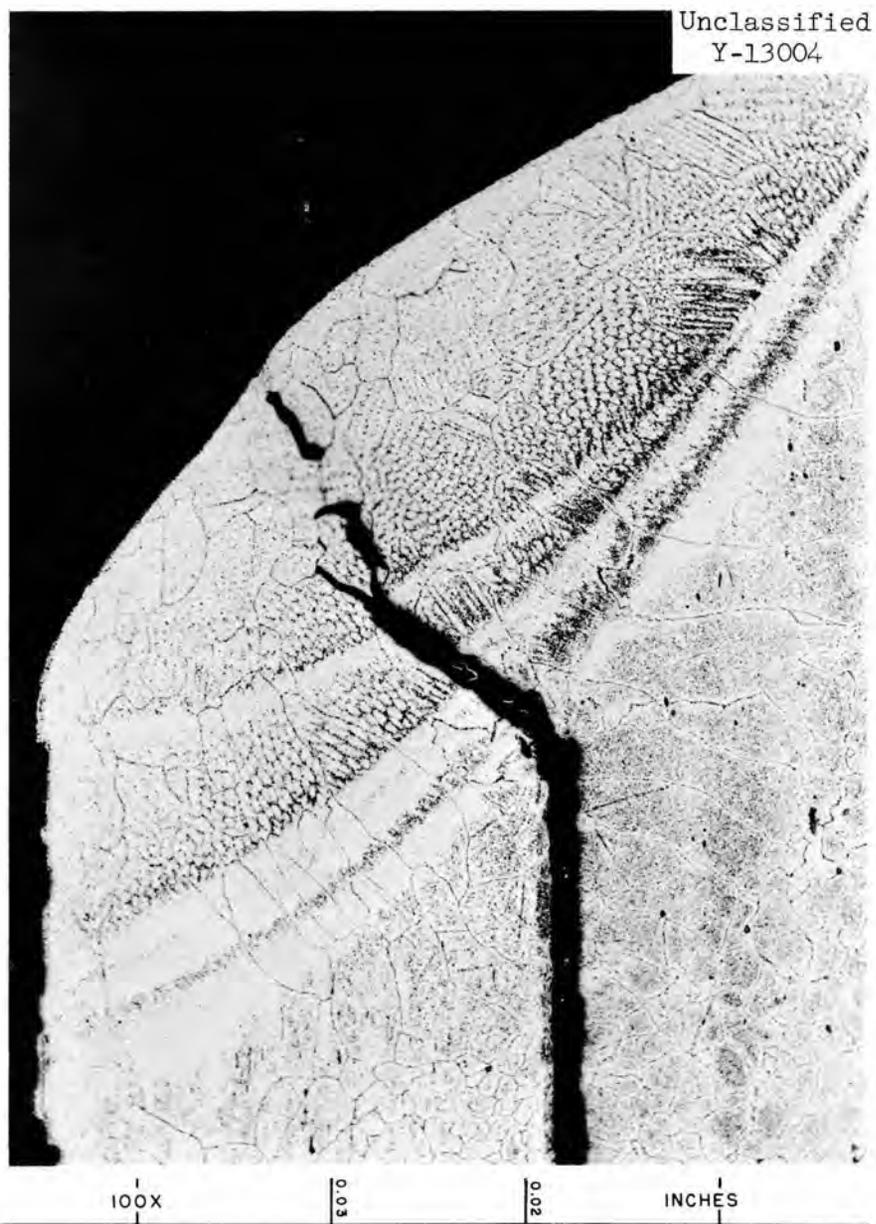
Photomicrograph of Cracked Tube-to-Tube Sheet Weld After Performance Testing. It can be seen that the crack propagated from the notch and penetrated the weld. Etchant: 10% Oxalic acid-electrolytic.
